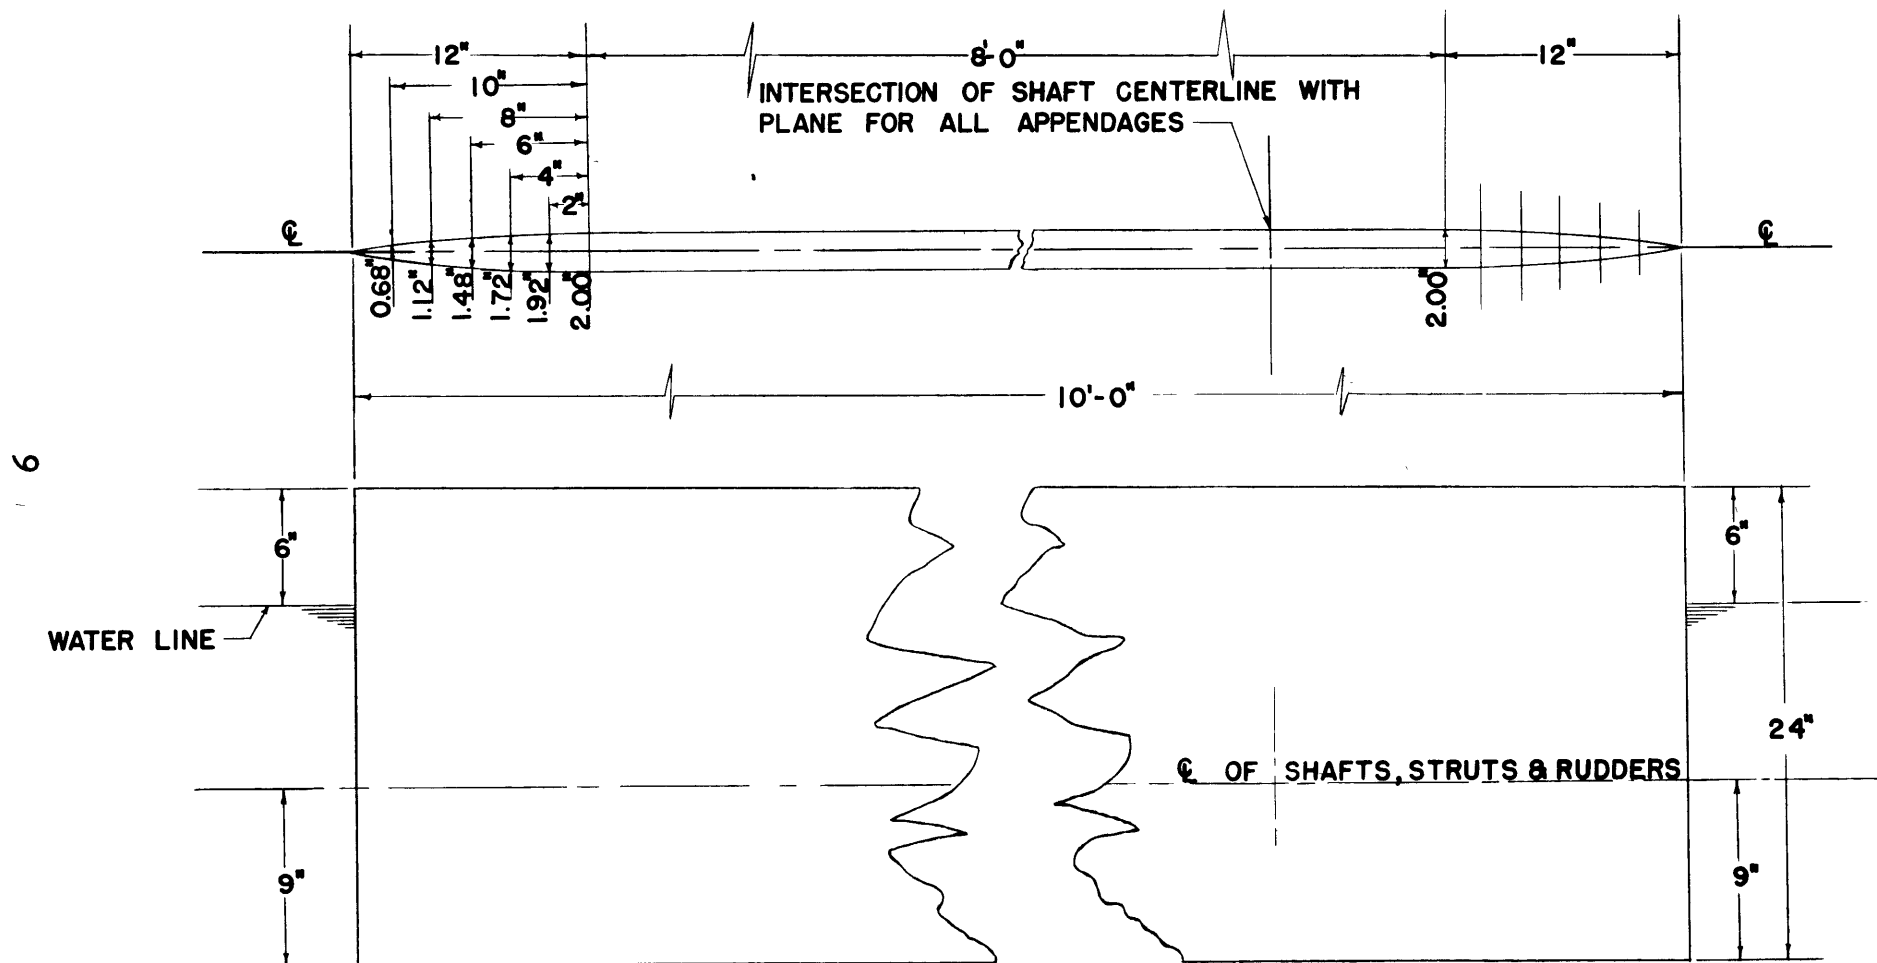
FRICTION PLANE ON WHICH THE APPENDAGE SETS WERE MOUNTED FOR TESTING
